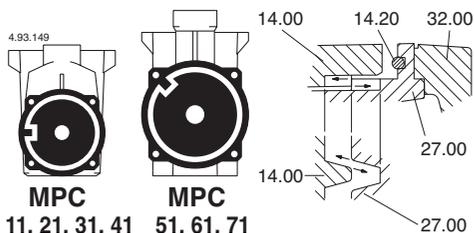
Locating lug/slot for assembling pump casing (14.00) - diffuser cover (27.00).
